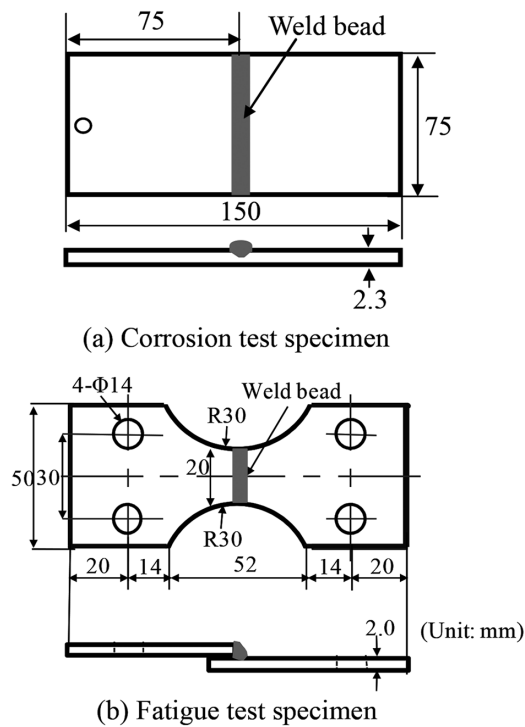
Shapes and dimensions of arc welded specimens
